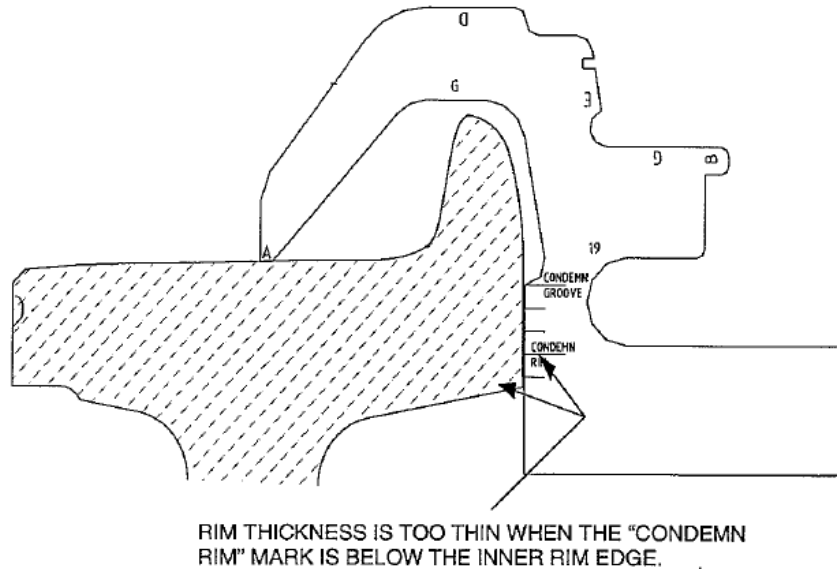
Wheel Condemn Gauge No. 300008 - thin rim indication
